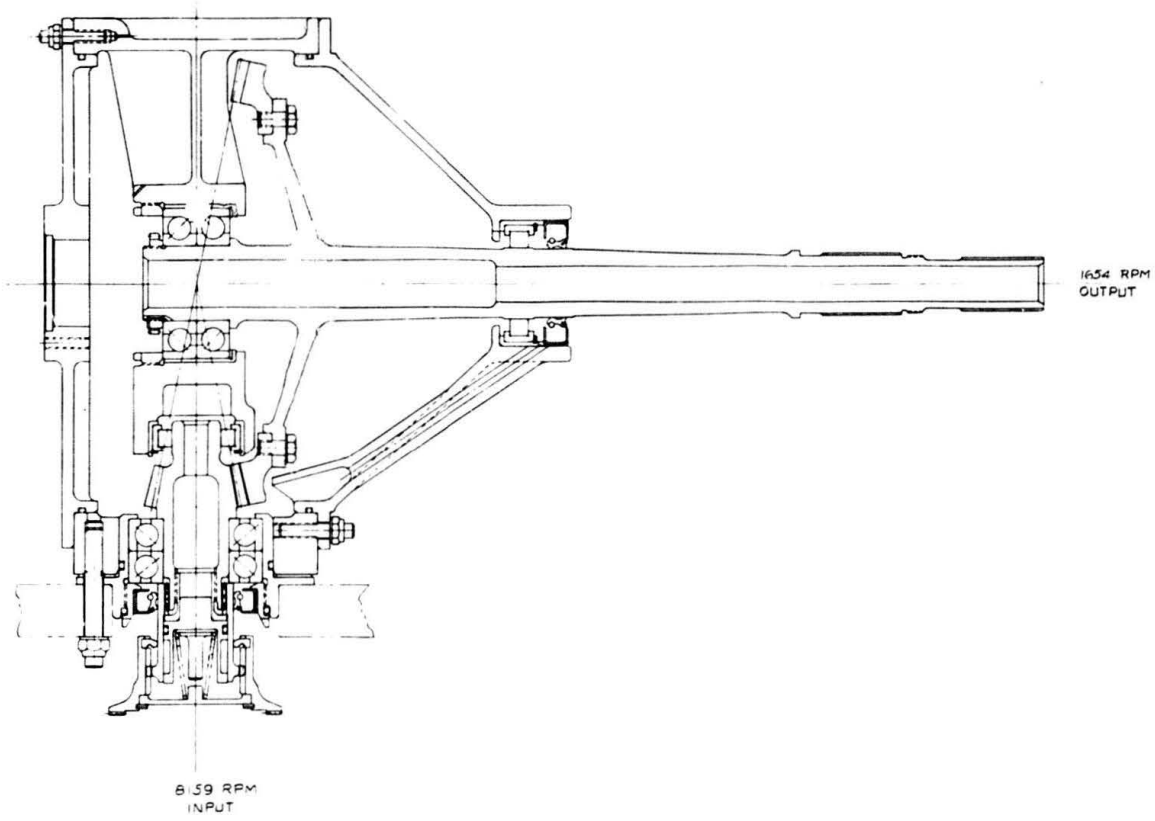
90° Gearbox - Supercritical - Antitorque Drive System
